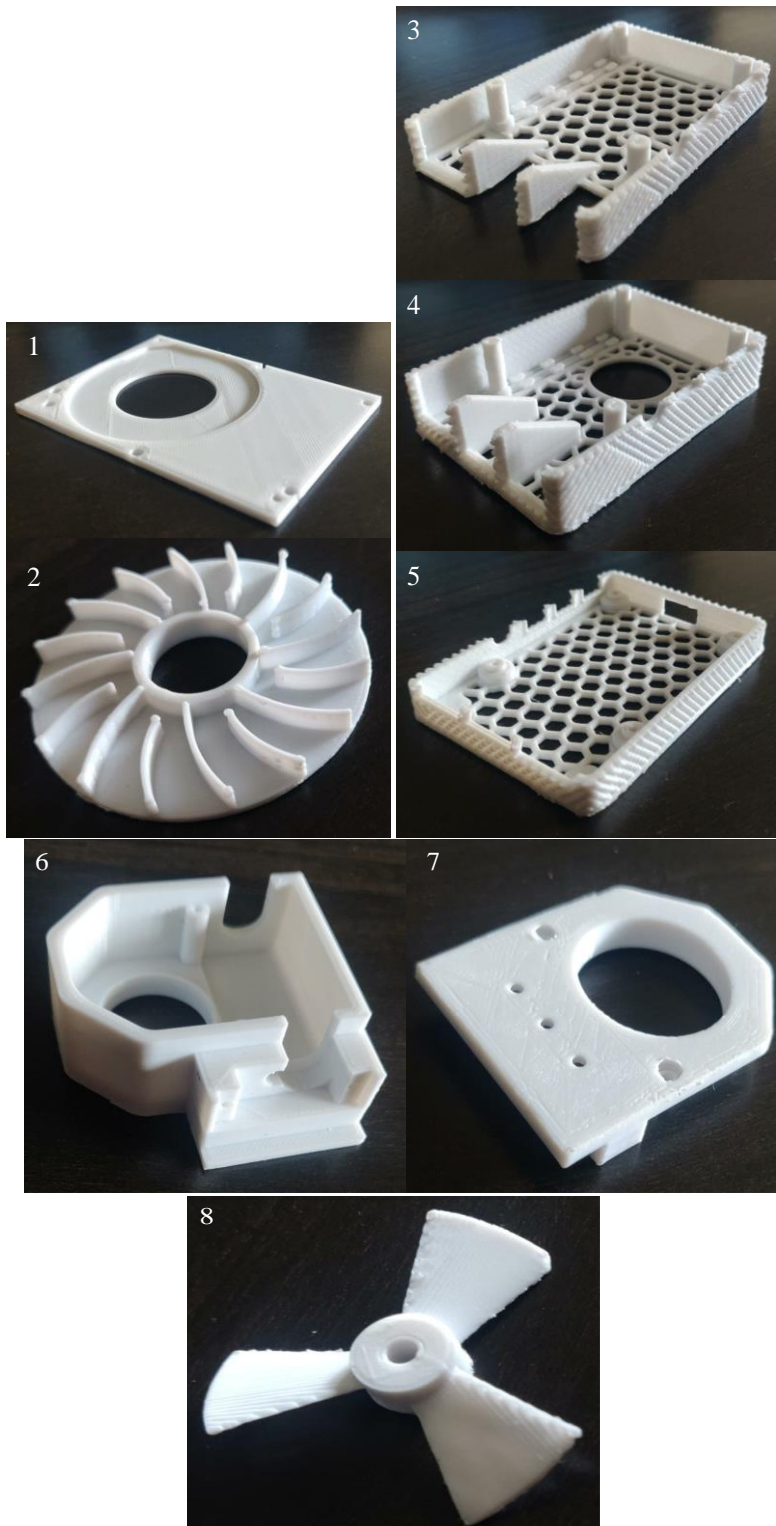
Representative components printed using H60 1. Hard disk fan cover 2. Hard disk cooling fan 3. External device connector - top case 4. External device connector - colling fan unit 5. External device connector - lower case 6. Power pac - lower case 7. Power pac - top case and 8. Thrust propeller.
